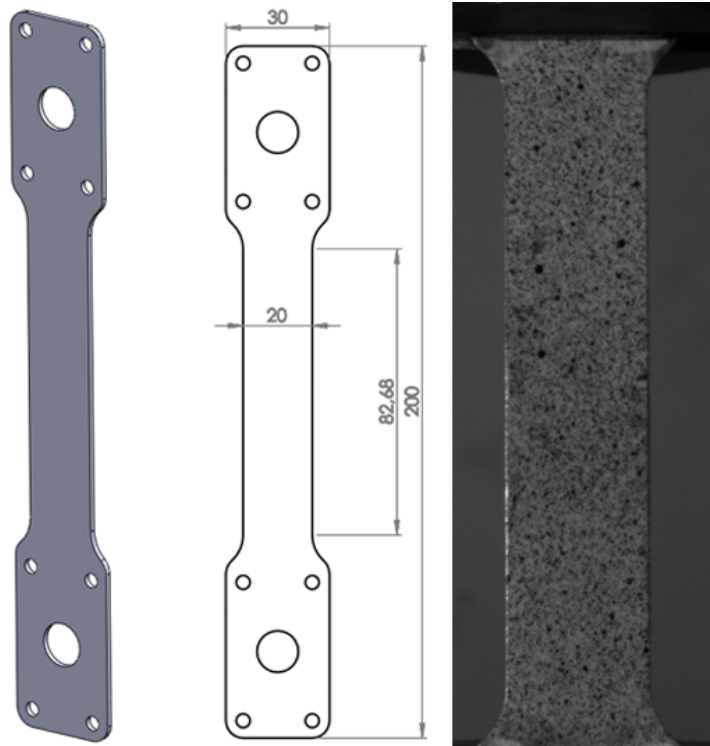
Uniaxial tensile specimen with a constant cross-section.
